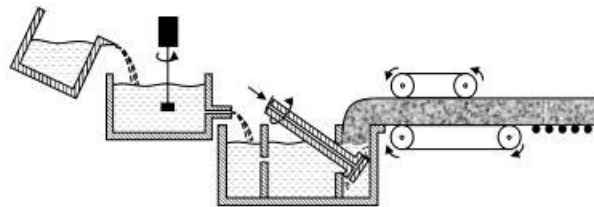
The foam casting process employed by CYMAT; the process is composed of melting and holding furnaces, the foaming box, and foaming equipment, and a twin-belt caster. (Source: Korner and Singer 2000)
